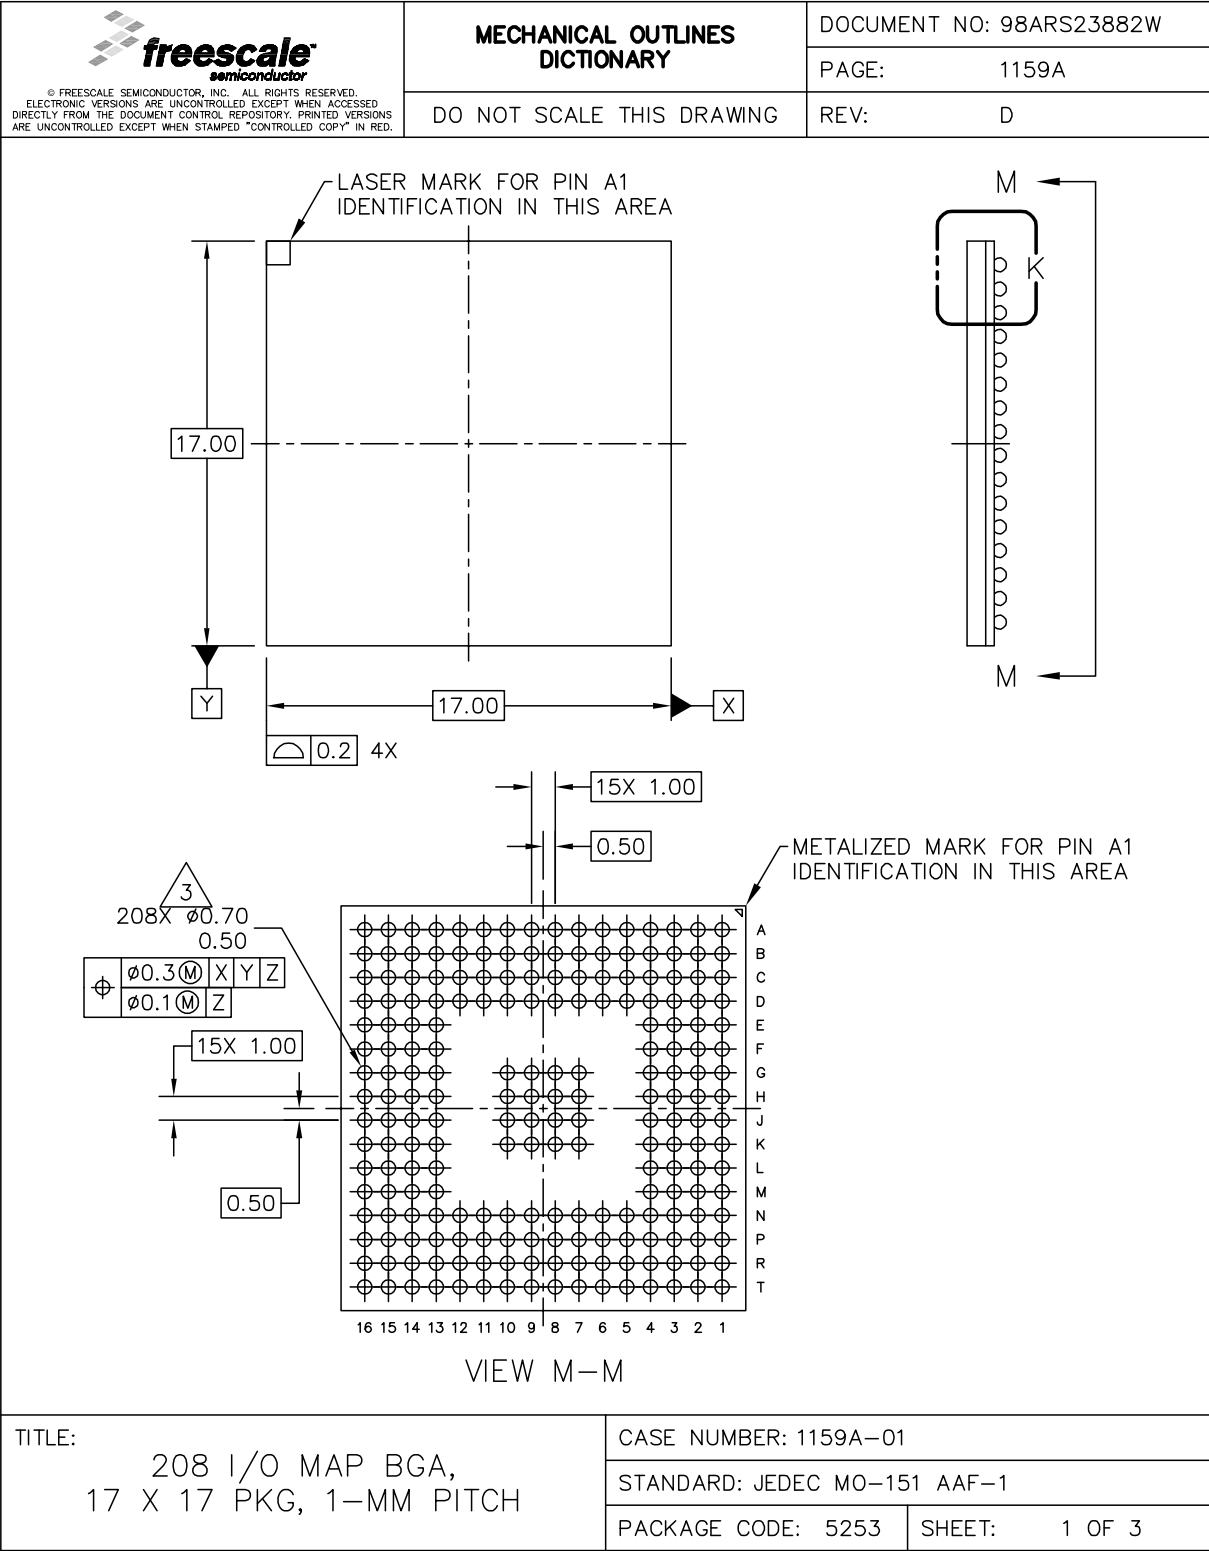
208 MAPBGA package mechanical drawing (part 1)
